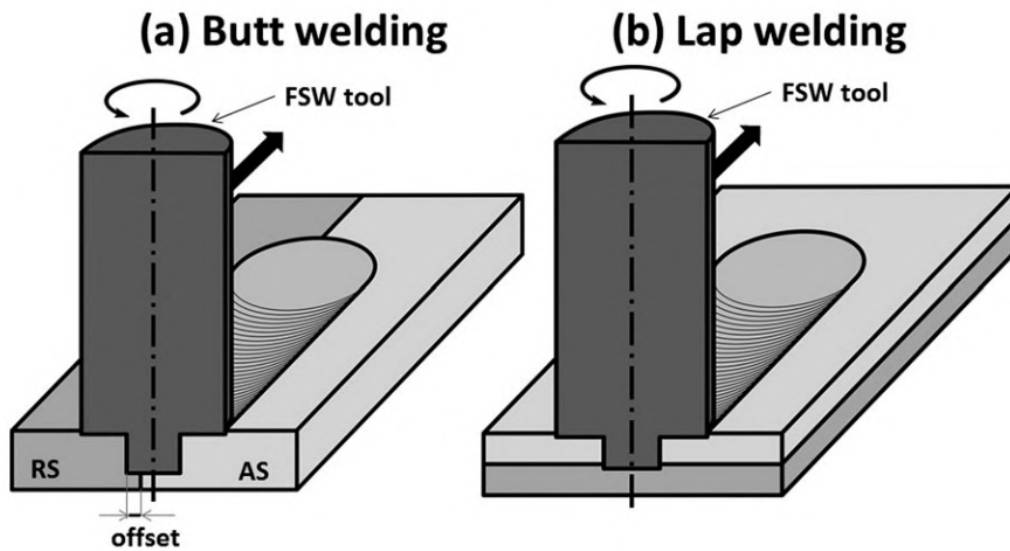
Dissimilar friction stir welding for (a) butt and (b) lap joints. AS and RS are respectively the advancing and retreating sides. Tool offset in FSW butt joints is indicated [25]
